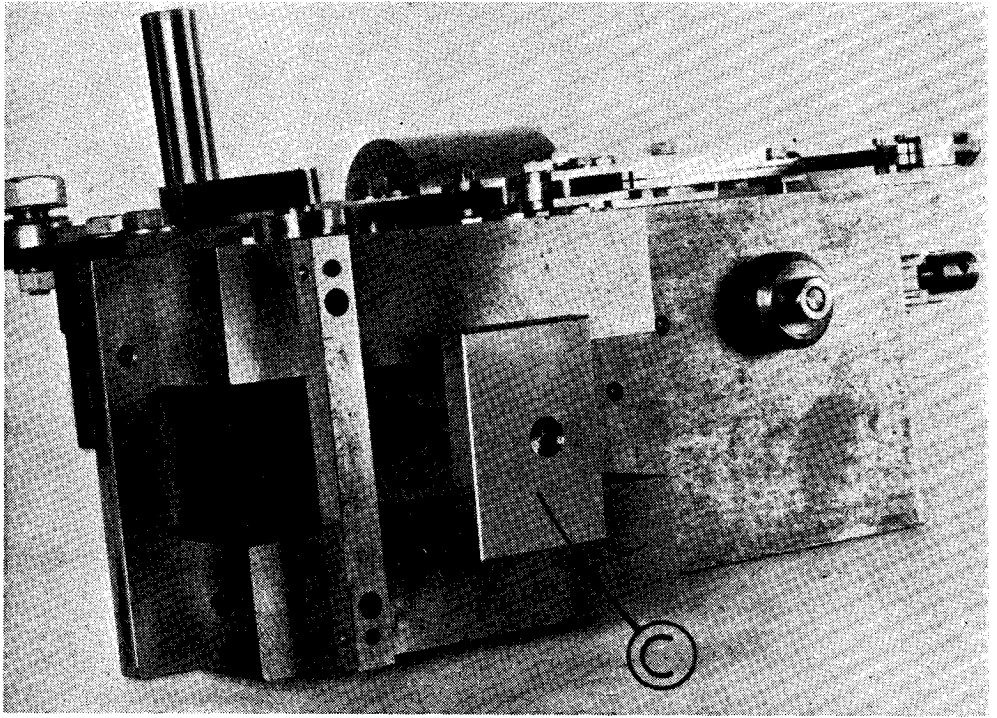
Underside of the base, showing the raising blocks, the guide strip and the clamp bolt with its clamp plate, "C"
